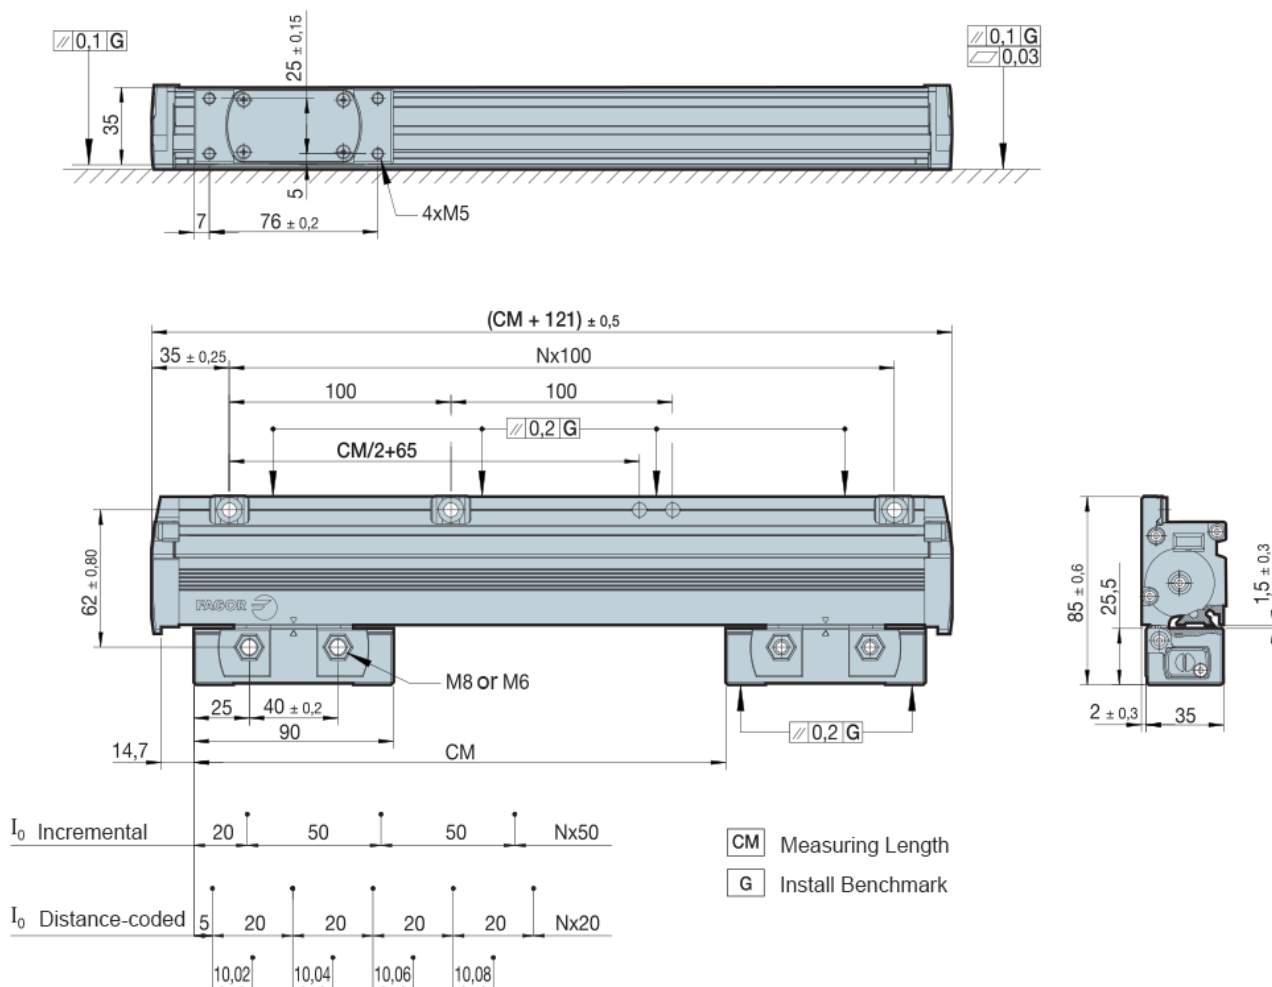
Dimensional drawing of FAGOR incremental G2 series scale
